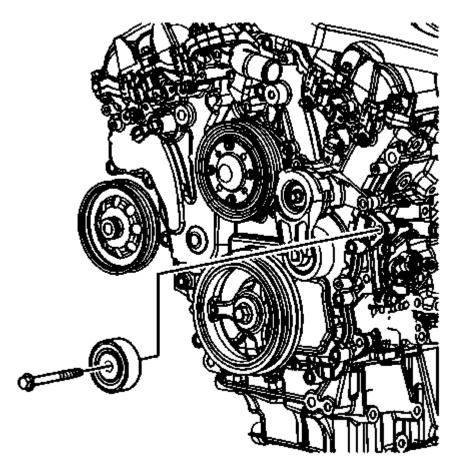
Identifying Drive Belt Idler Pulley & Bolt Courtesy of GENERAL MOTORS COMPANY
